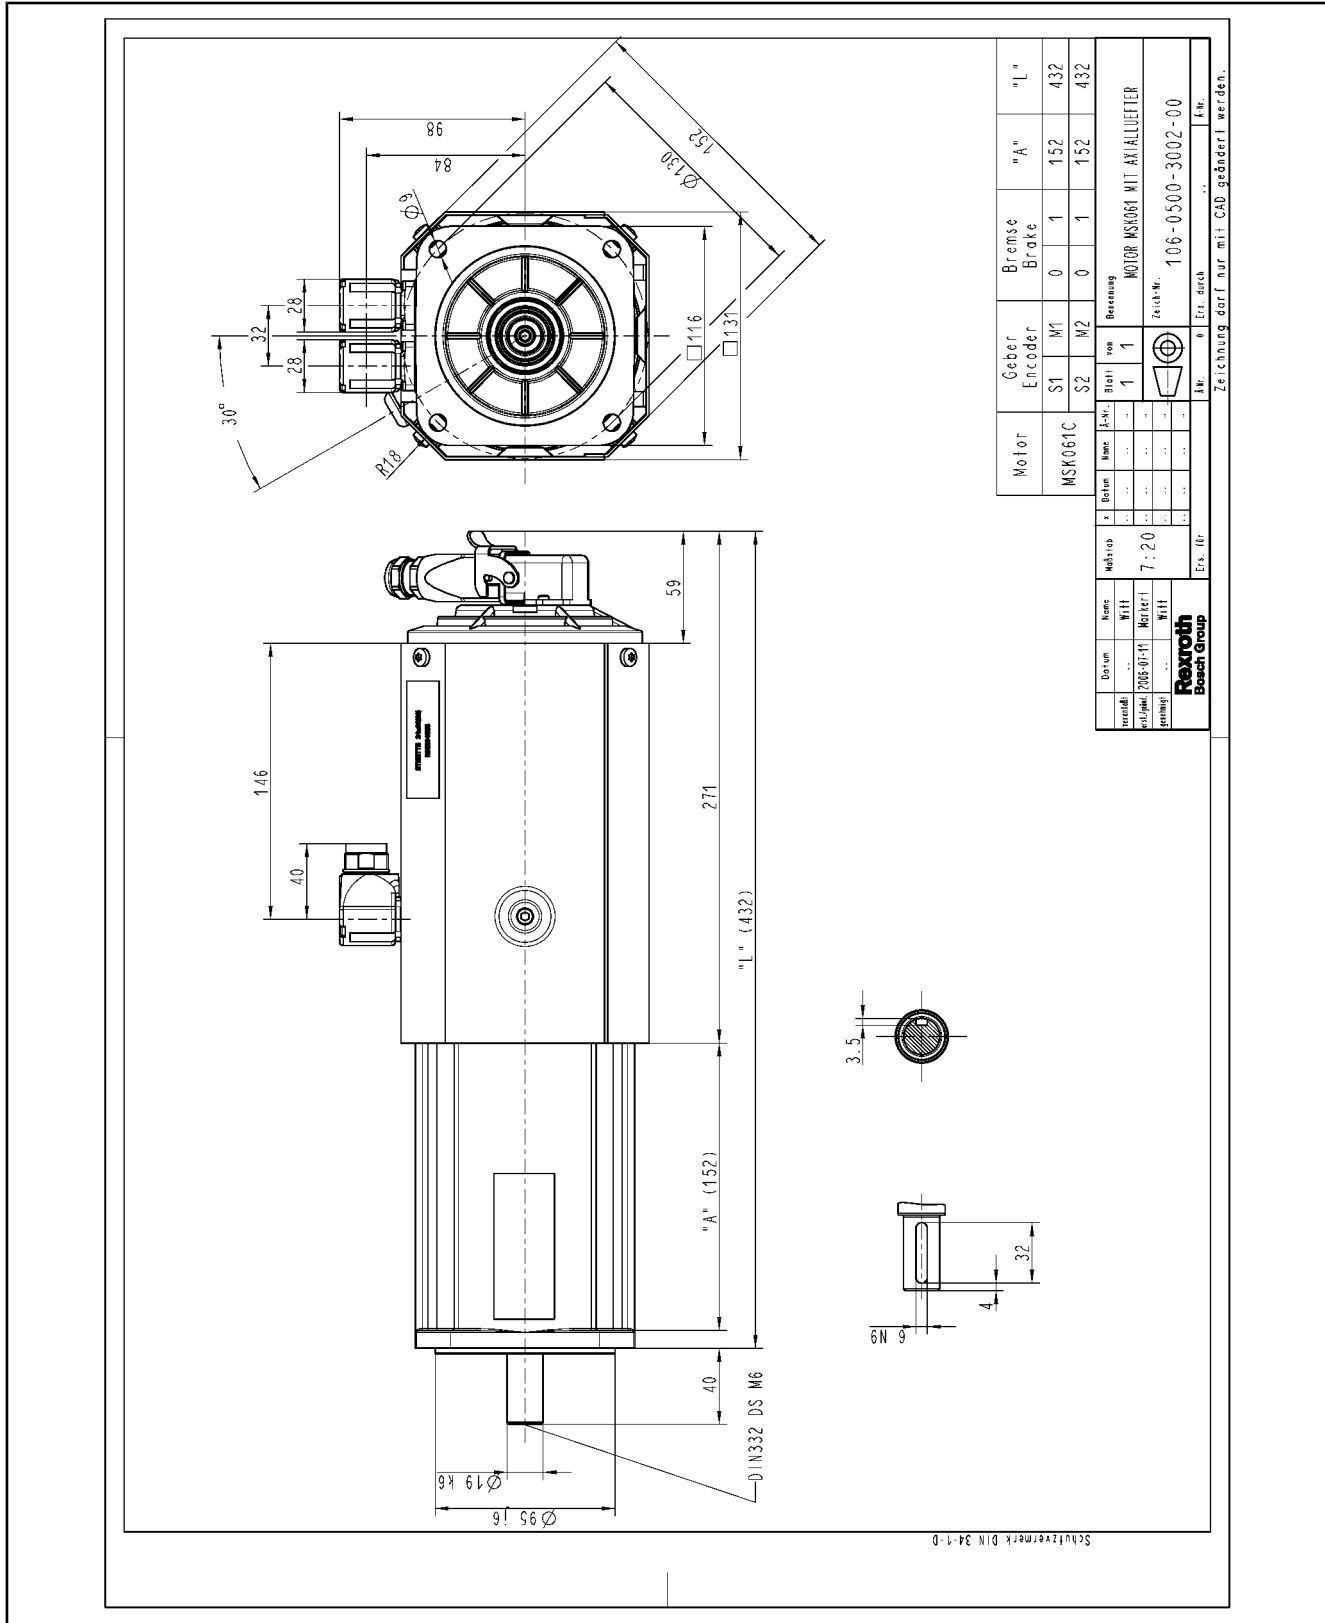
Dimension sheet MSK061 with axial fan unit
